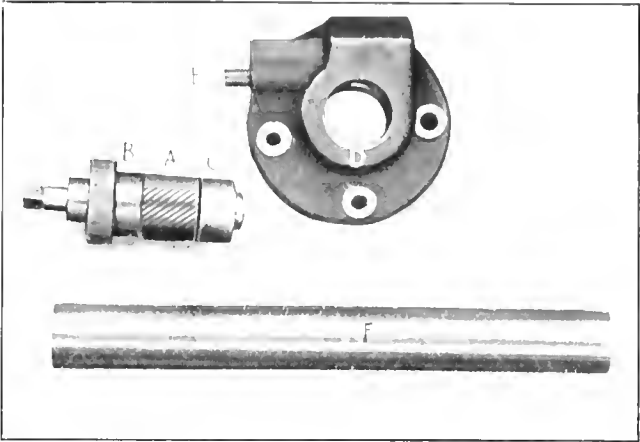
Special Tools for Reaming and Testing Clamp Bolts
